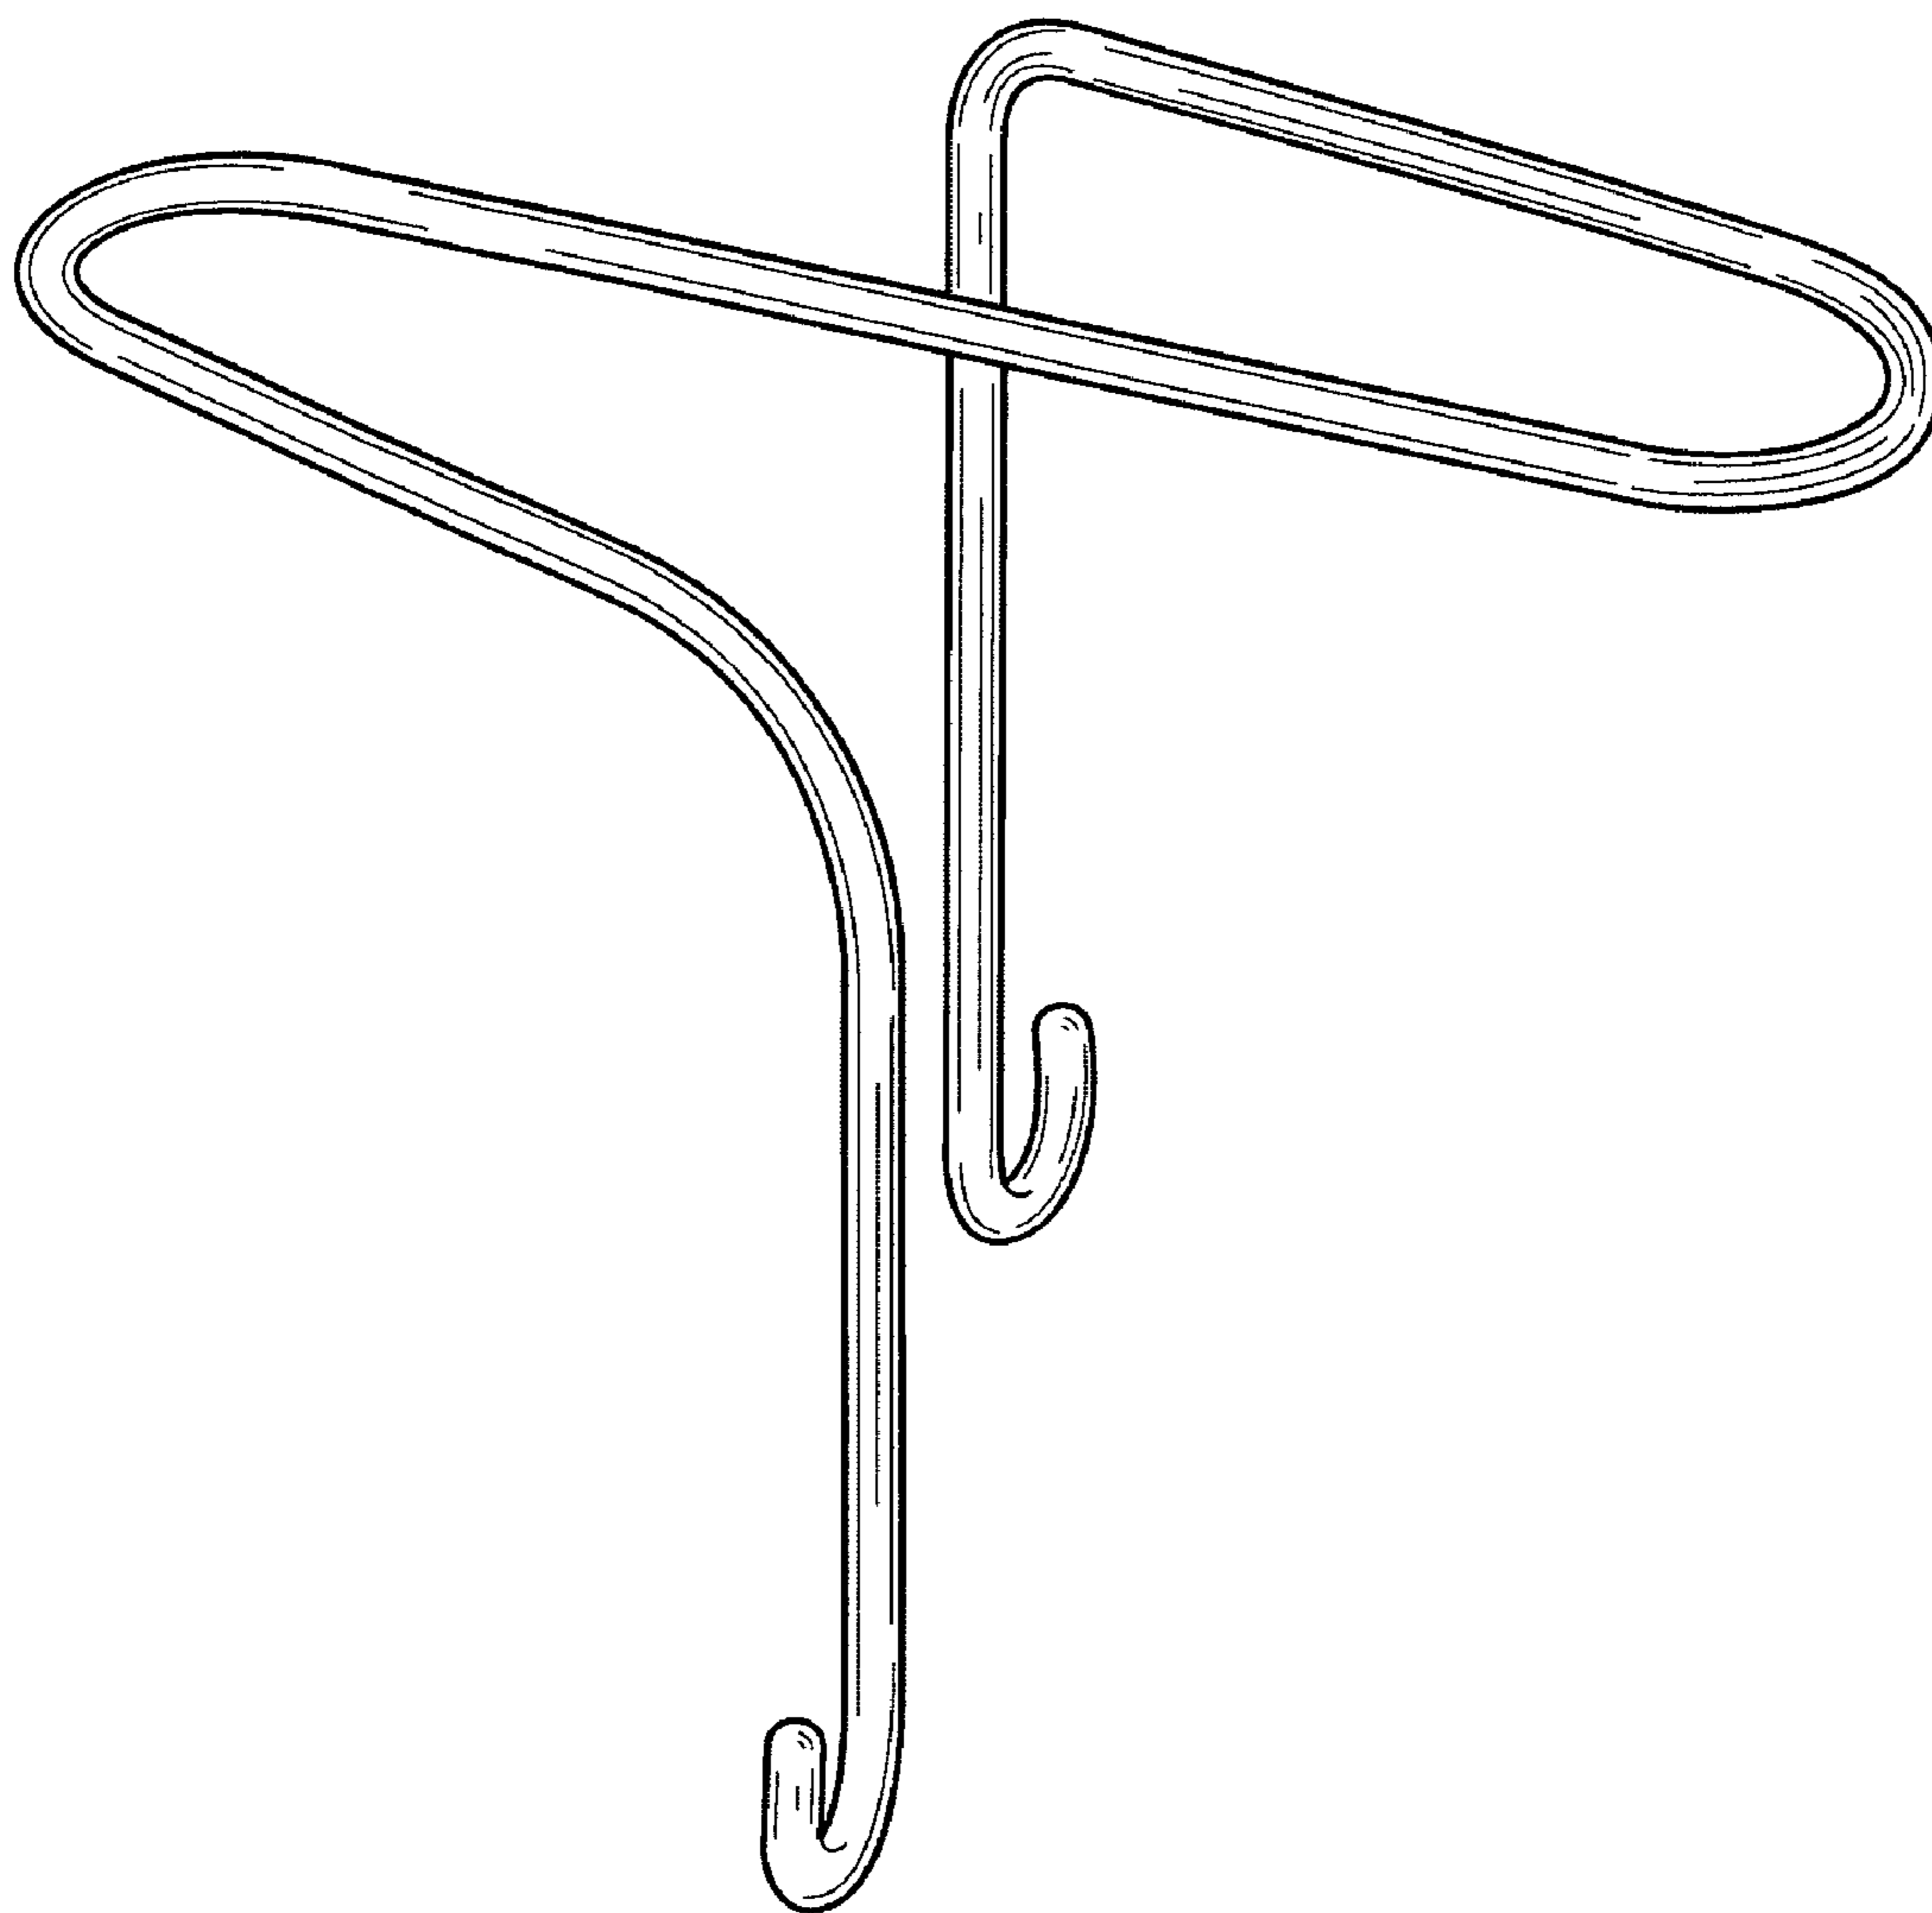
is a view illustrating a side of the hanger opposing the side of FIG. 4;
